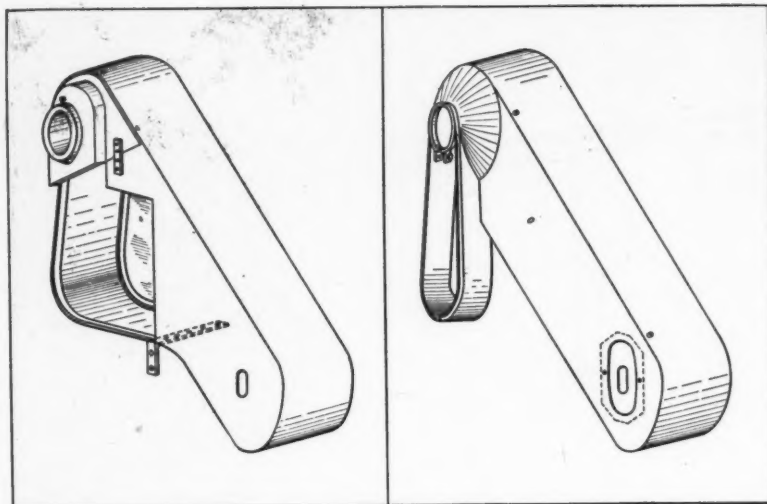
(Left) Belt Guard before Redesigning for Welded Construction. Fig. 8. (Right) Welded Belt Guard
